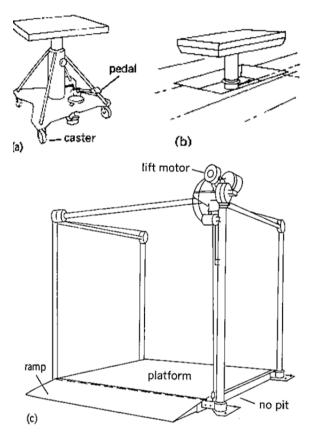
Examples of industrial lifts. (a) Hydraulic elevating work table. (b) Hydraulic lift floor leveler. (c) Motor-driven floor leveler
